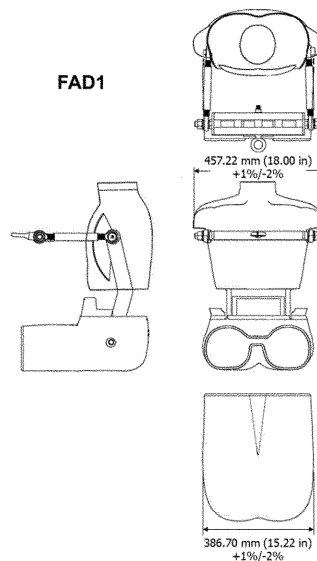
to § 571.210–FAD1 (provided for illustration purposes)
